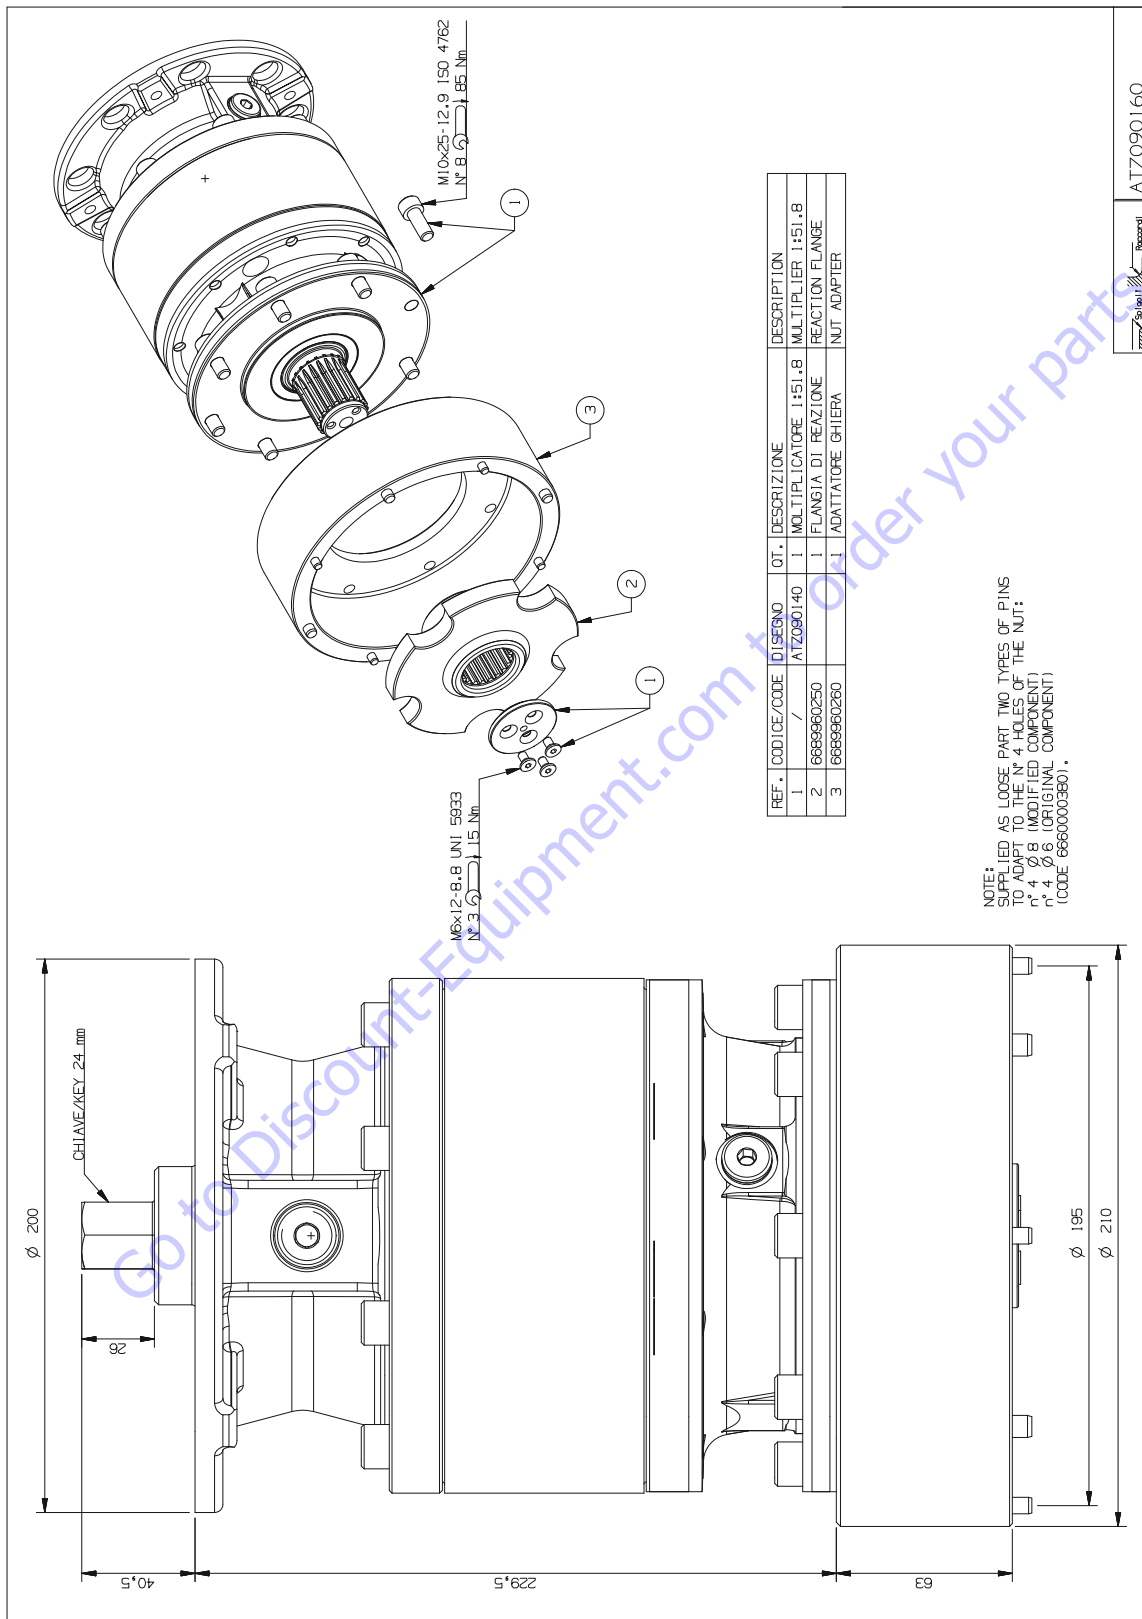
Drive Hub Special Tools - Sheet 4 of 4
